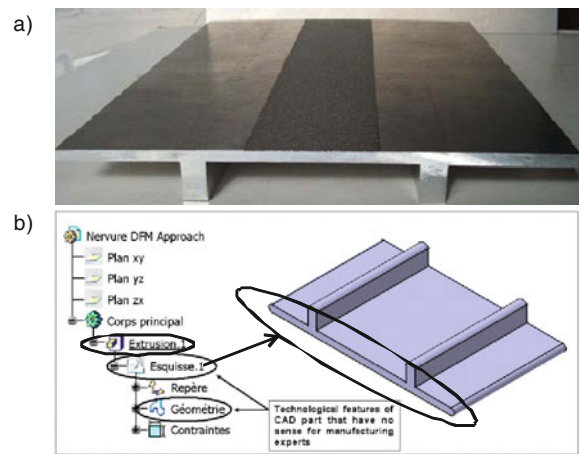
(a) Physical wing cover – (b) Incoherency between CAD model breakdown and manufacturing plan
